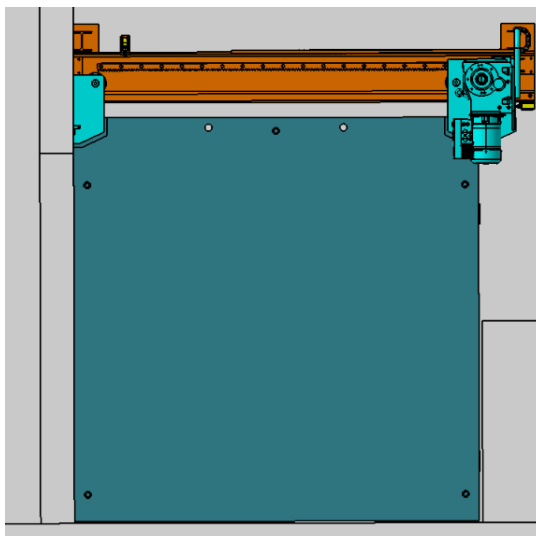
Heavy sliding door assembly when the shielding door is closed.
